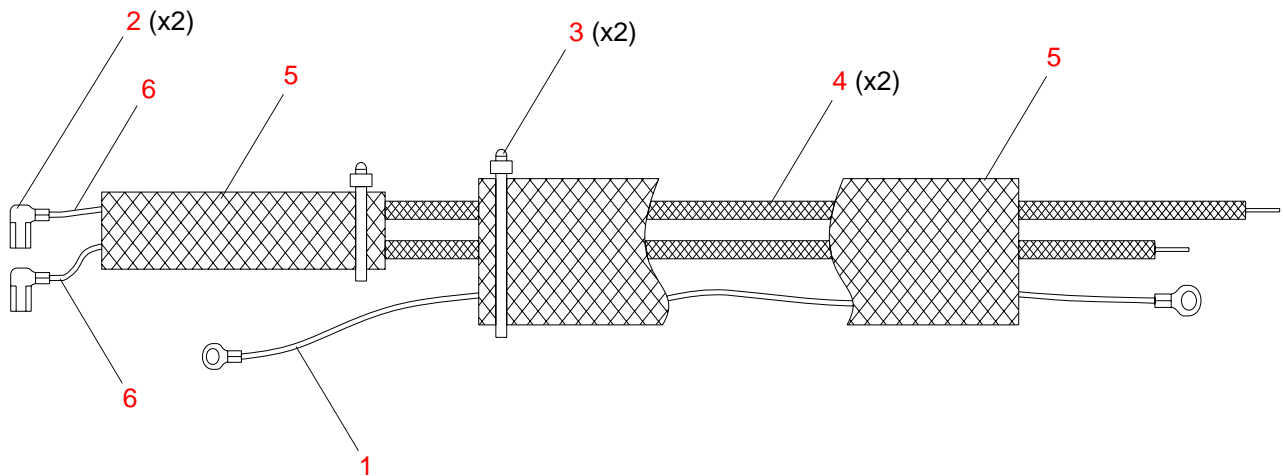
VL500 Head Earthing Cable Assembly
